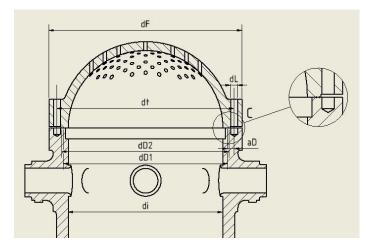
Metal to metal contact flange type used in the RPV closure head with detail view of the double gasket.
